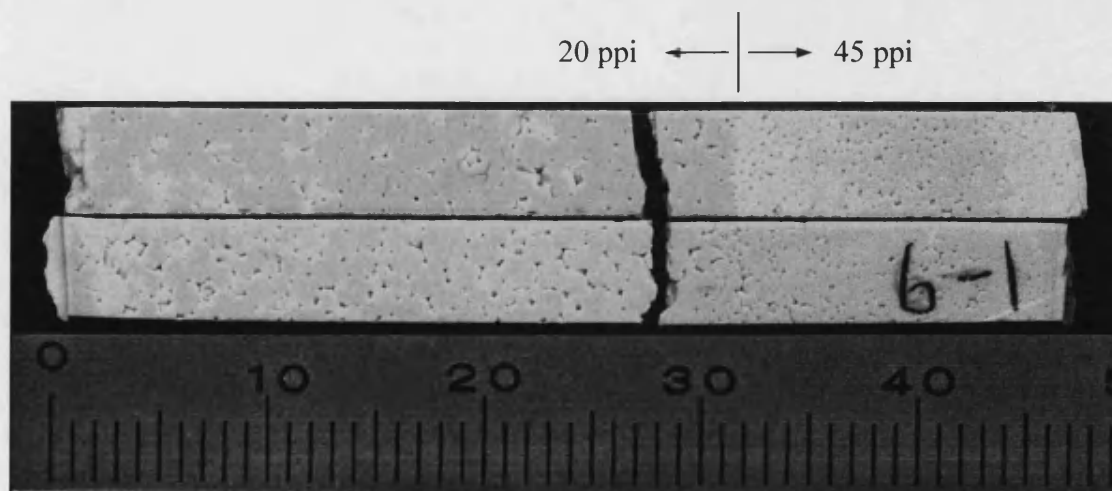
The fracture mode of the FGM bars after four-point bend testing.
